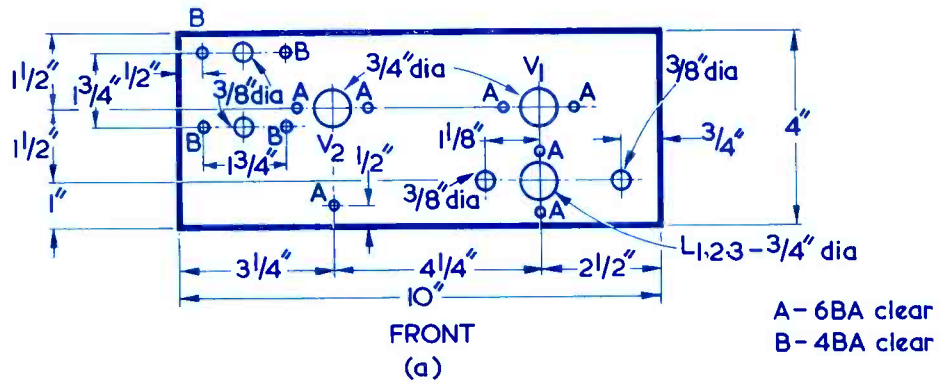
Showing the drilling details for: (a) the chassis deck
